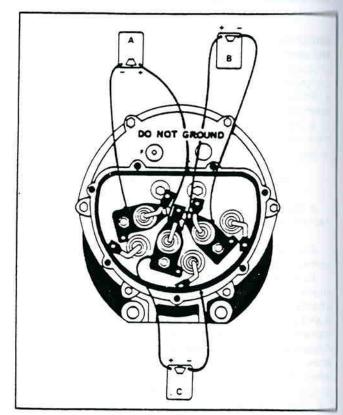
Checking Stator Windings for Opens and Grounds.
